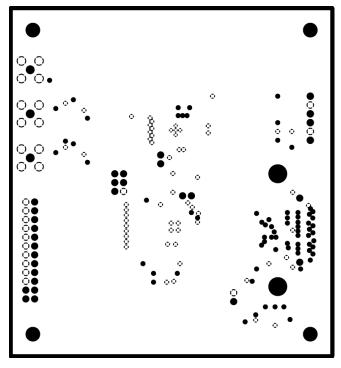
ADS8168 EVM PCB Layer 2: GND Plane
